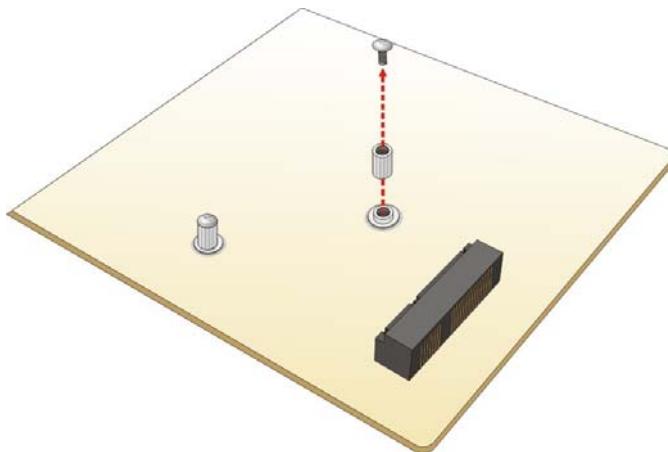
Removing the Retention Screw and Standoff for a Half-size PCIe Mini Card
